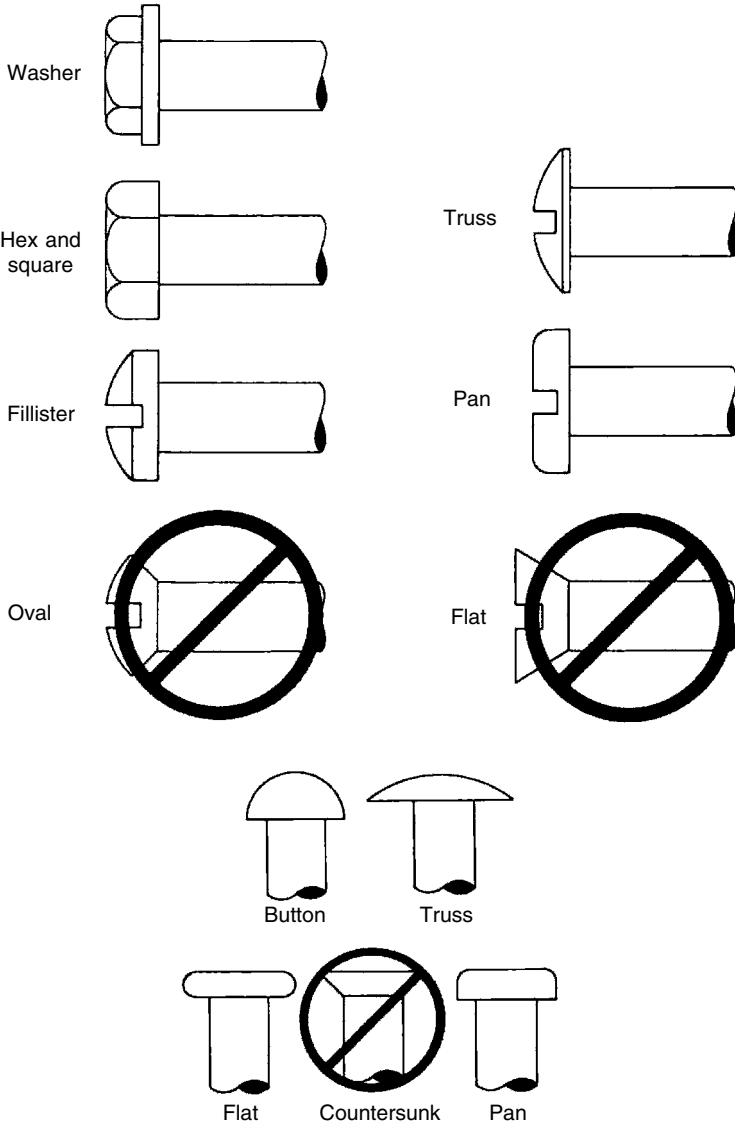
Common head styles for screws, bolts, and rivets used to join plastics. (From Ref. 17.)
